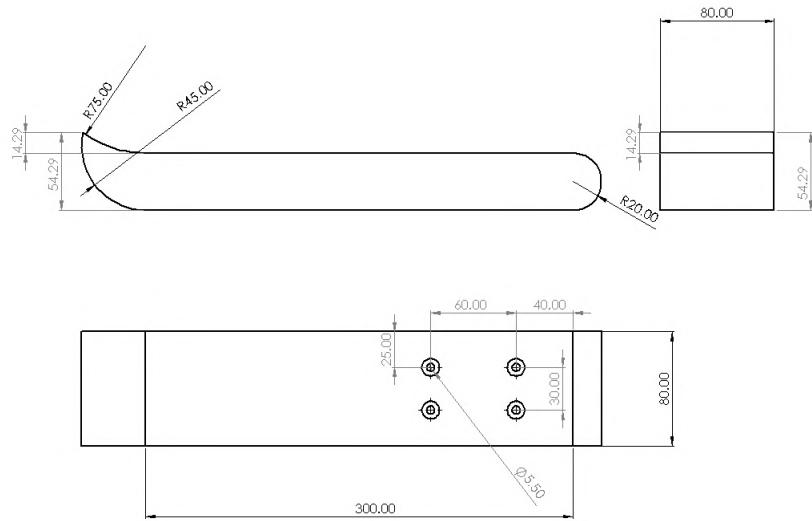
2D Drawing of the foot (All dimensions are in mm)
